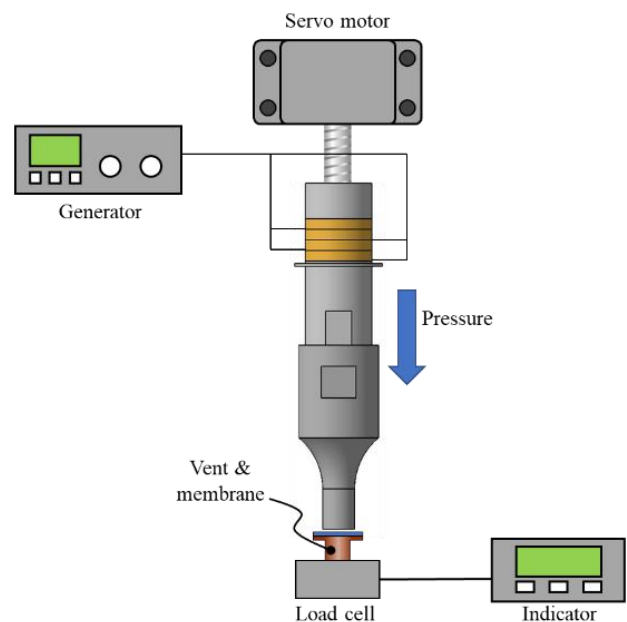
Schematic diagram of the ultrasonic welding system
